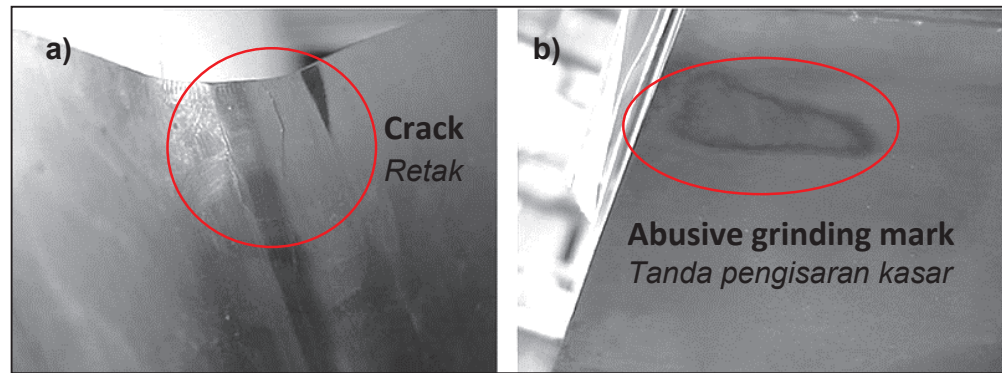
a) Crack formed on gear after grinding operation, and (b) abusive grinding mark
